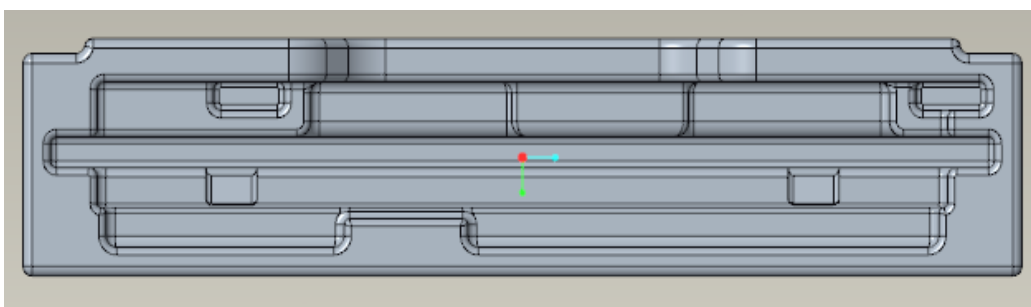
Peripheral load carrying walls for metal type of gas hobs.
